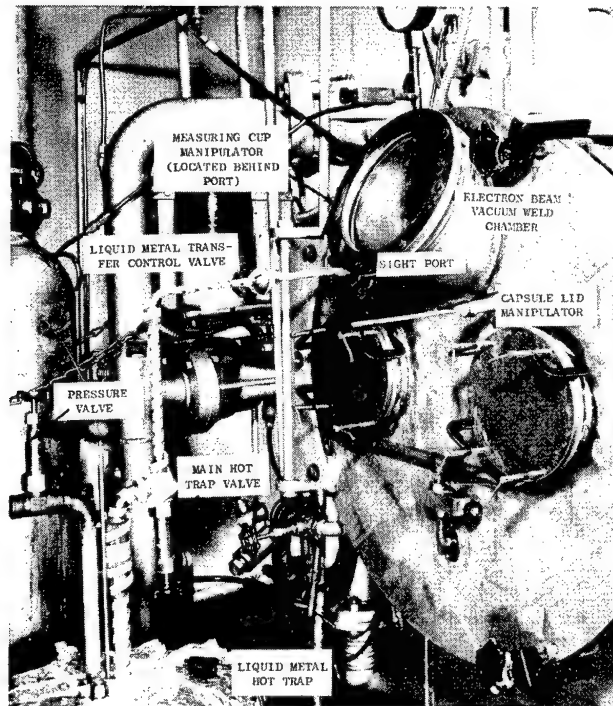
External view of the apparatus for filling capsules with liquid metal in a vacuum and sealing by electron beam welding.
